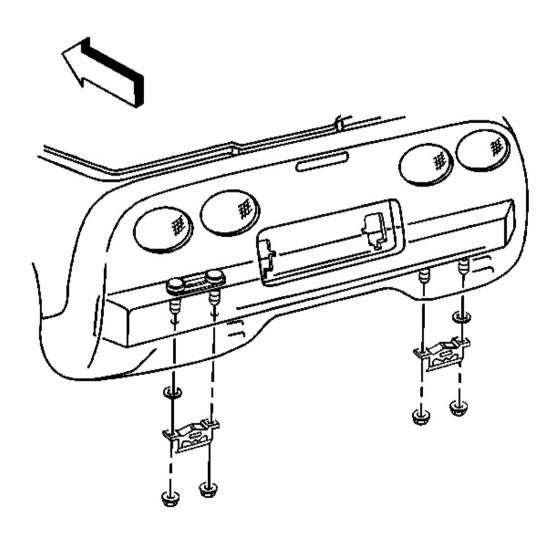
Muffler Hanger Nuts & Hanger Courtesy of GENERAL MOTORS CORP.
